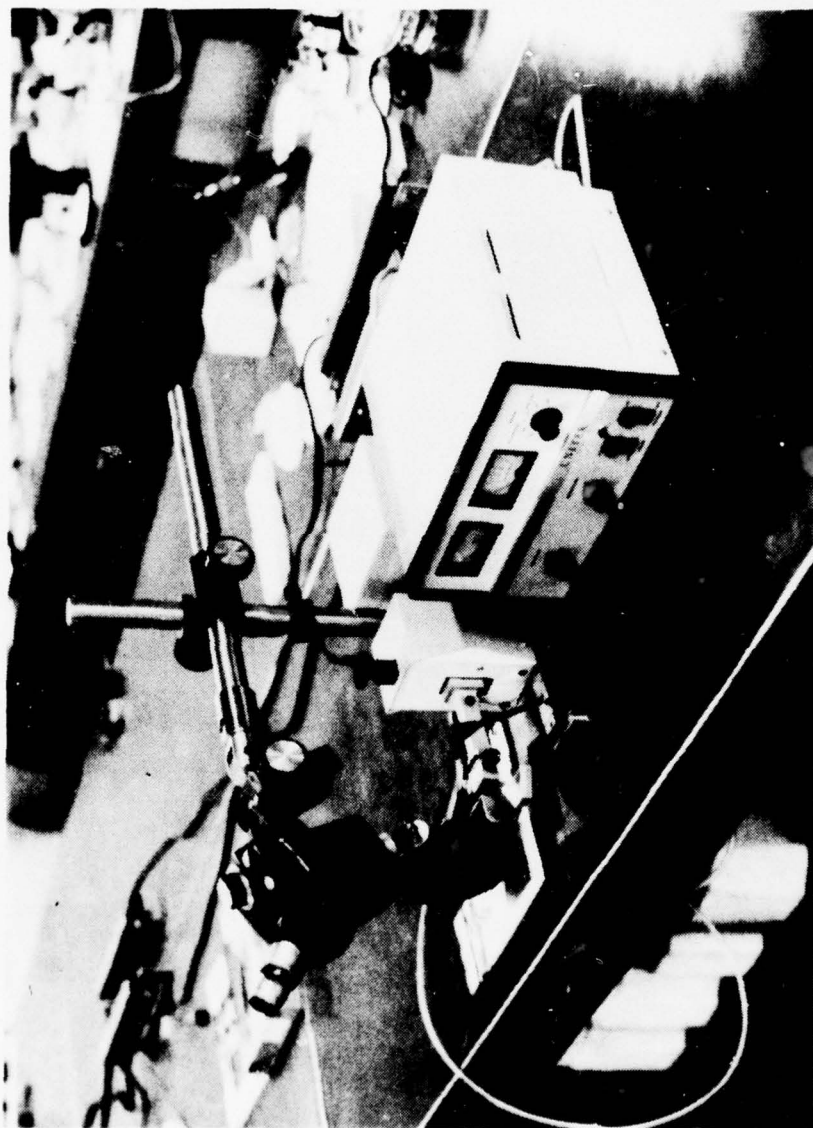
Welding Apparatus for Fly Ribbon Attachment.
